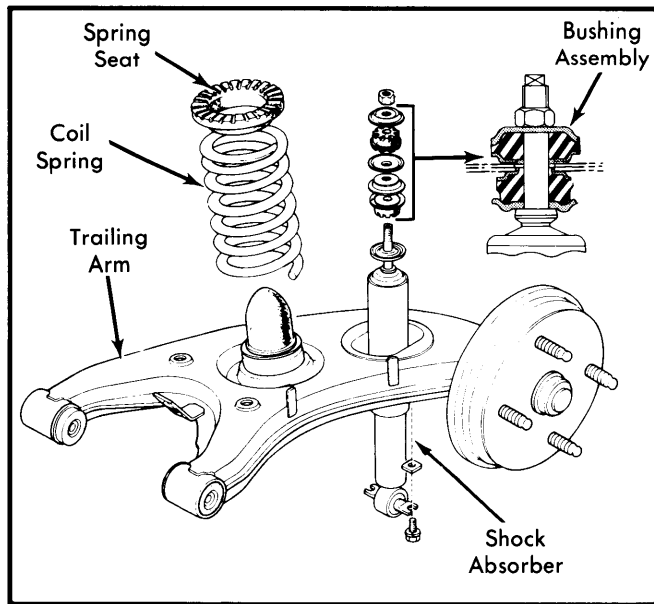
Exploded View of Datsun 310 Rear Suspension
